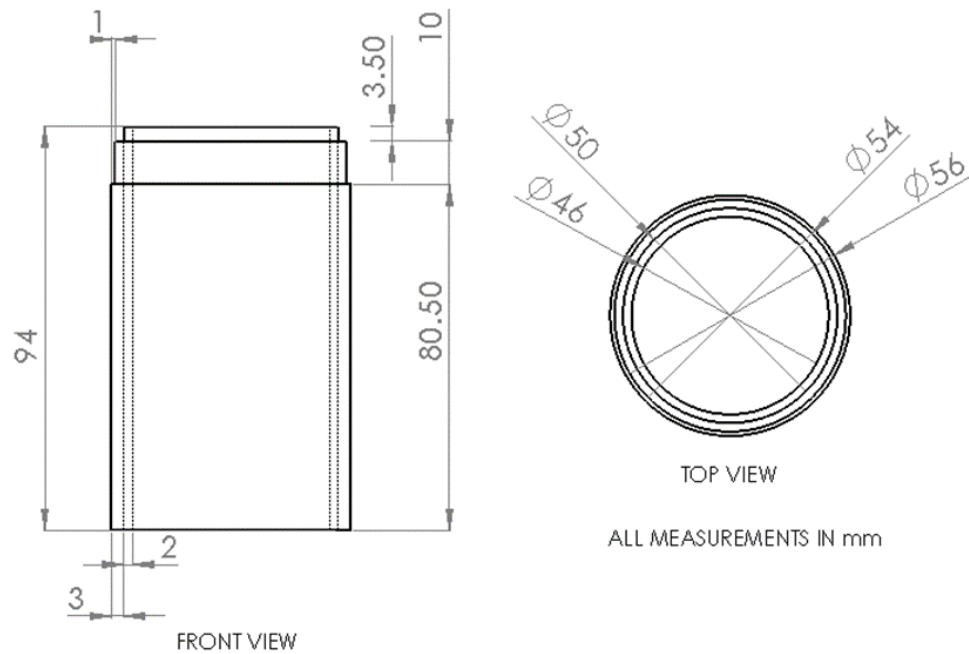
Front and top view for overwrapped samples with 3.5 mm fiberglass removed and a further 1 mm of glass fiber/epoxy removed for the following 10 mm length of the tube
